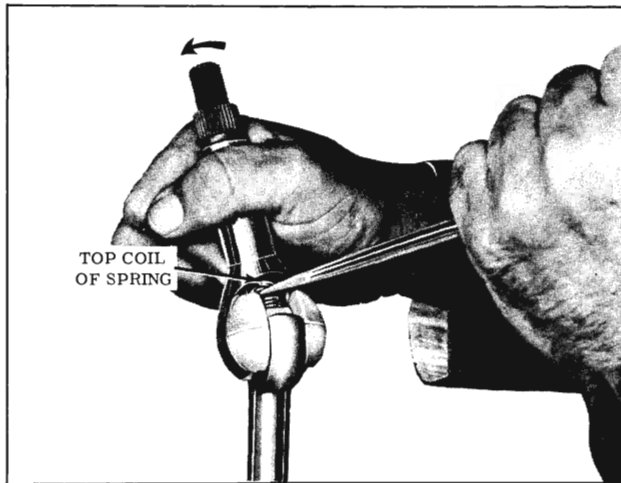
Removing Spherical Joint Spring upper seat. (Fig. 4-93)
